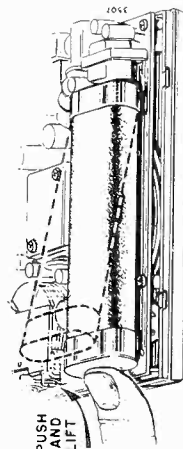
View Showing Method of Removing Later Type Battery Holder From Chassis Board.
